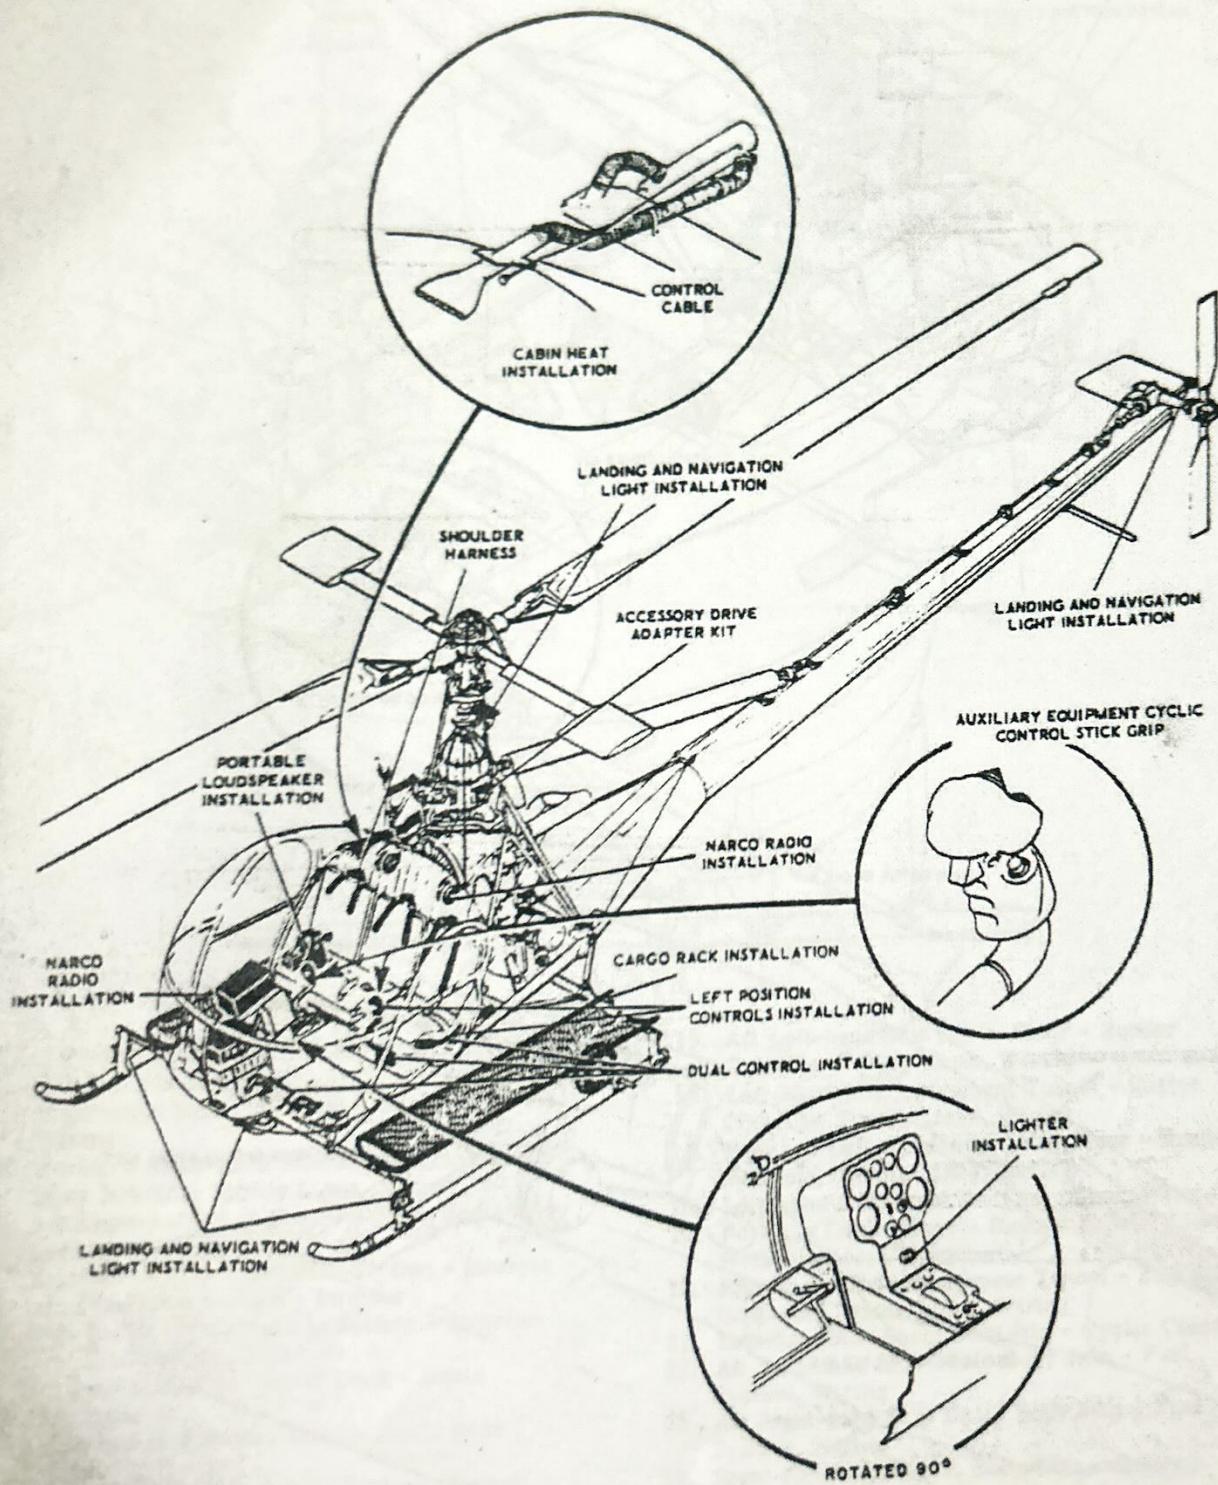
Accessory Equipment (Sheet 1 of 2)
